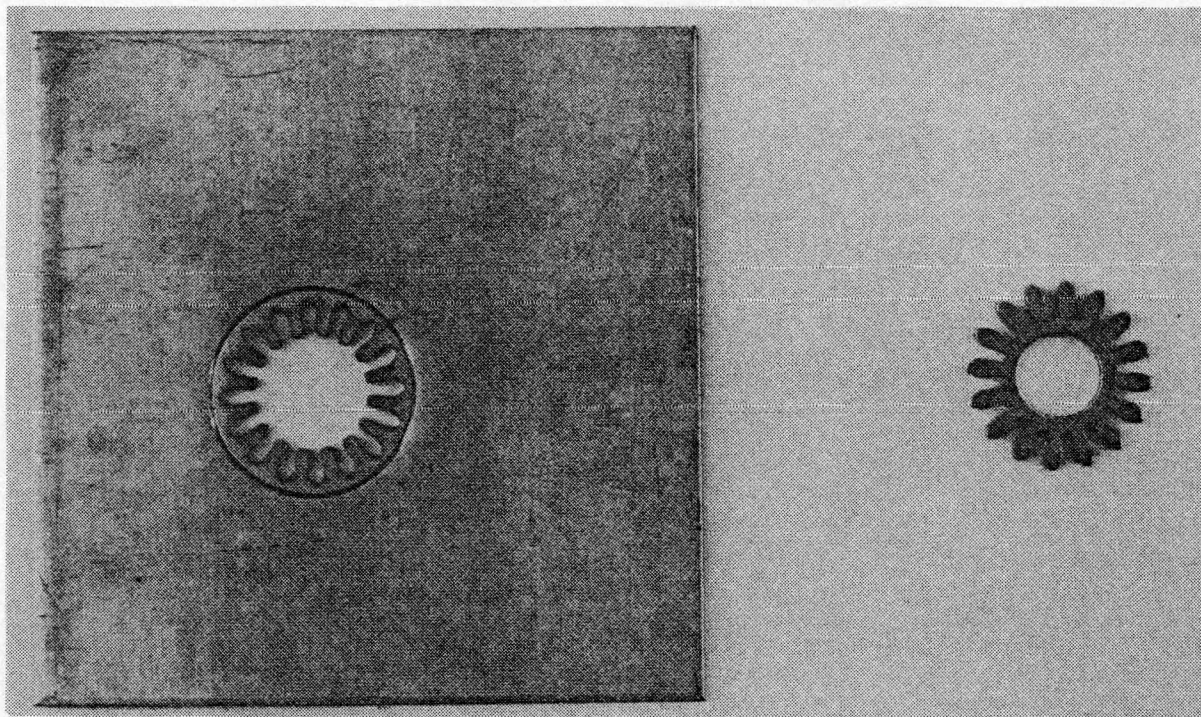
Spur Gear Blanked From 1/4-Hard Brass and 6061-T6 Aluminum
